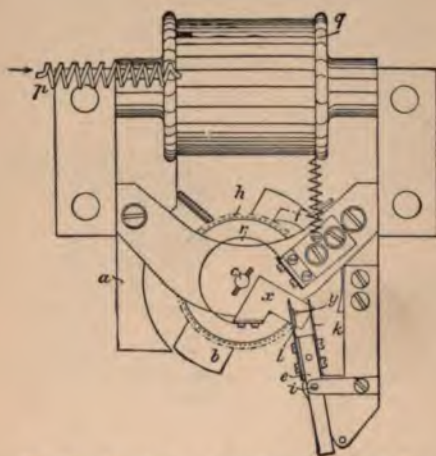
Aron Meter—Front Elevation of Winding Gear and Electro-Motor
